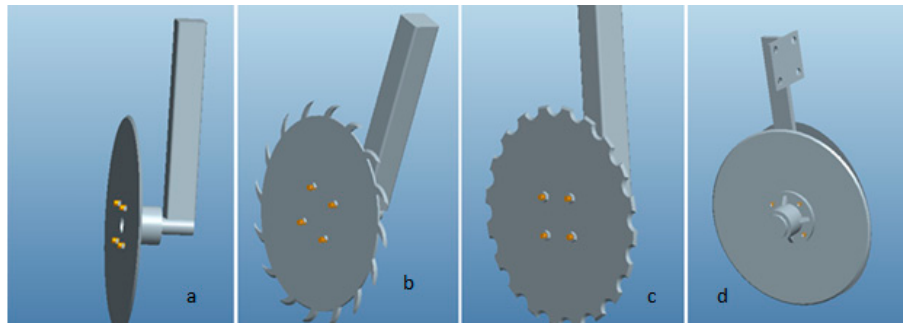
3D view of furrow openers: (a) smooth-edge single disc; (b) tooth-type; (c) notched-type; (d) smooth-edge double disc.
